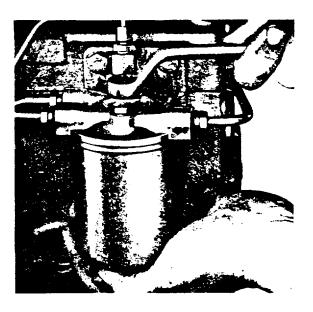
Removing the Fuel Filter Bowl Securing Bolt. (Earlier Type)
